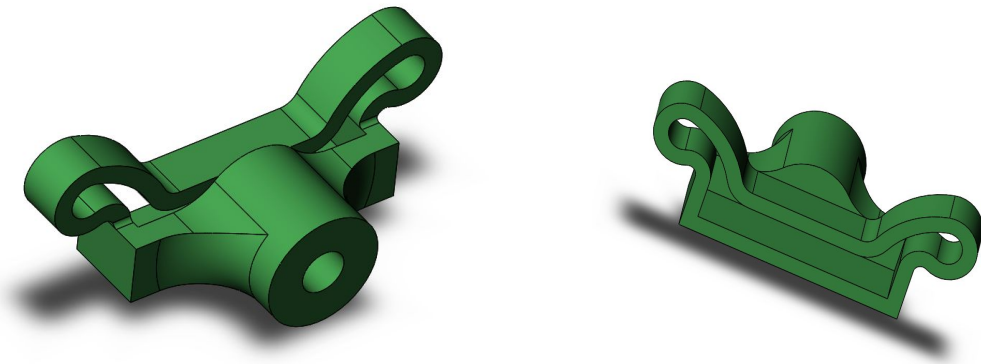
Prototype Mirror Strip Holder (Back Isometric View on the Left and Front Isometric View on the Right)
